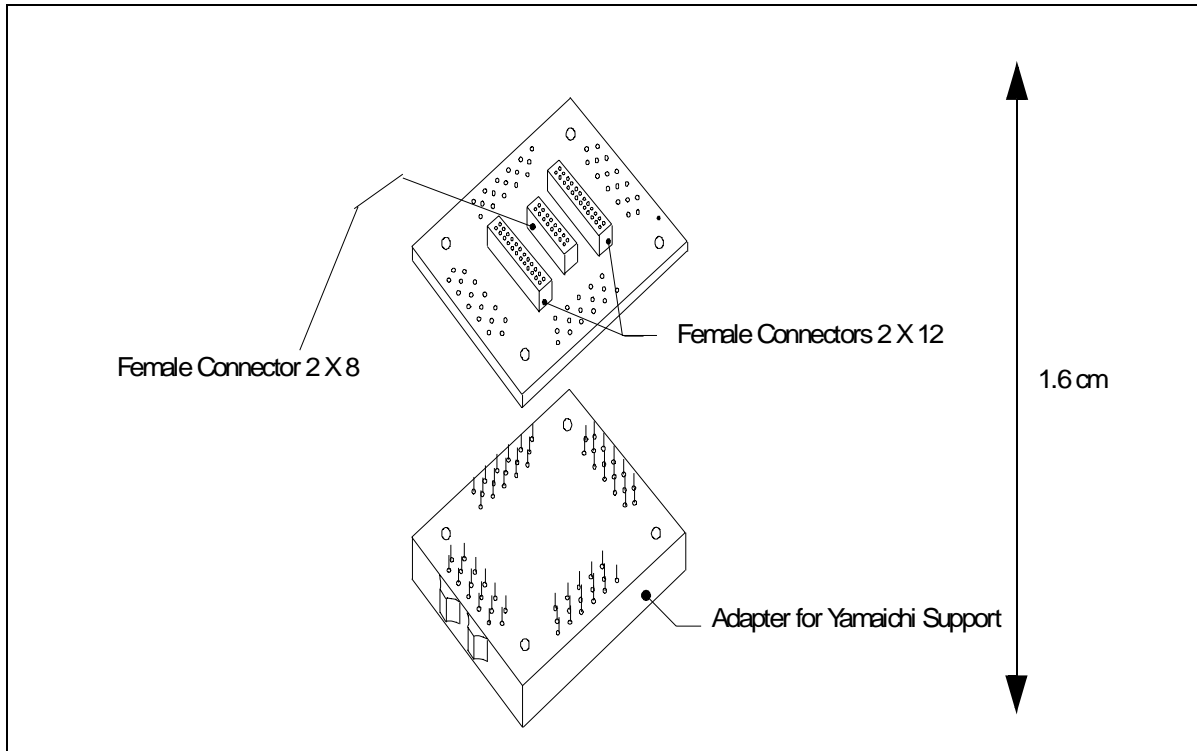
QFP64 Probe Adapter (ref.: DB200) Components Layout
